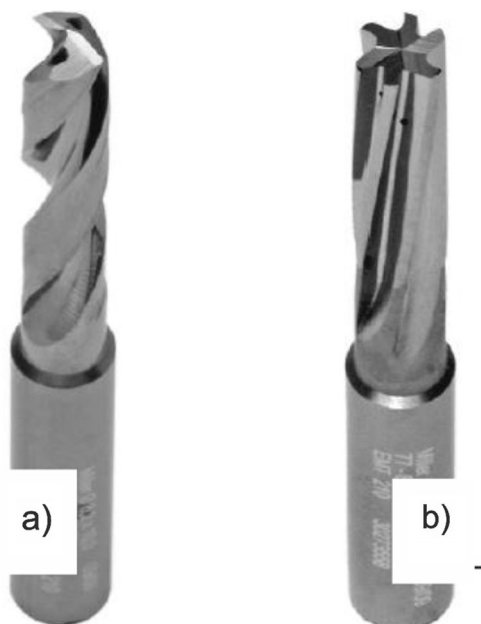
Uncoated solid carbide cutting tools made from EMT210 Extramet rounded bars. a A twist drill to produce rough bolt hole. b A reamer to finish the final shape of the bolt hole
